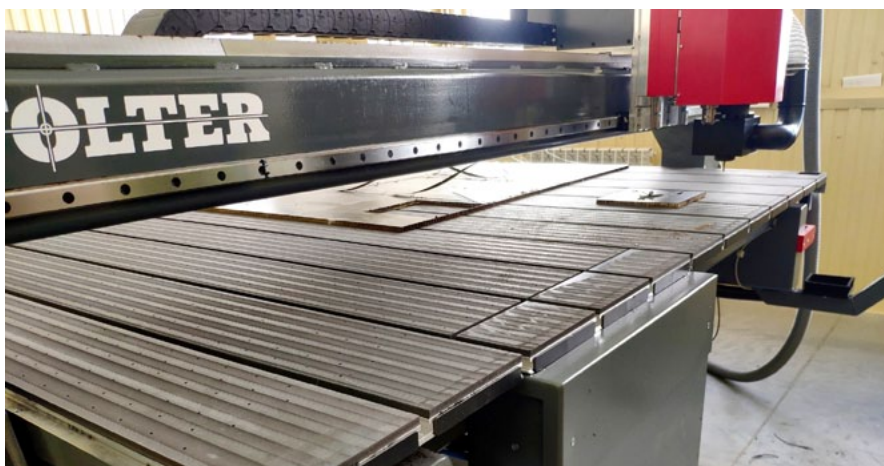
will produce Airbus aircraft panels with its CNC machine
